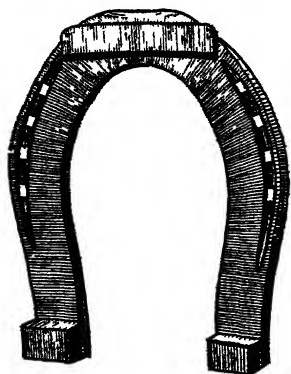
Right fore-shoe with calkins and toe-piece.
